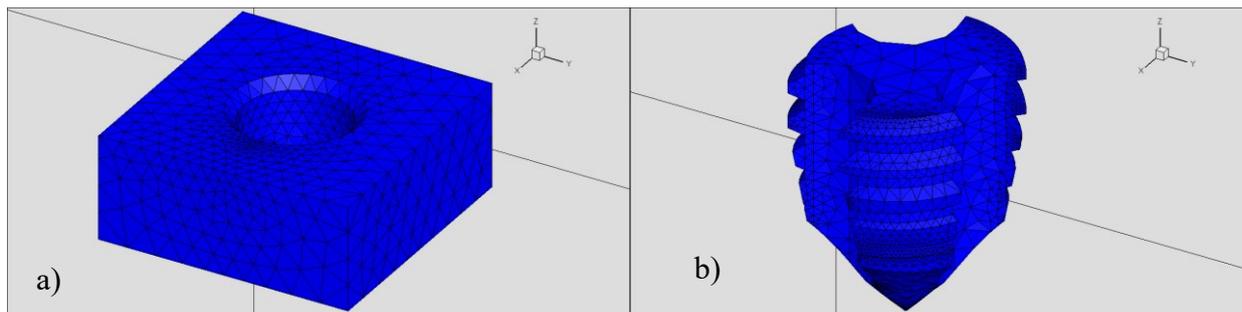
Tetrahedral mesh in the a) workpiece and b) toll
